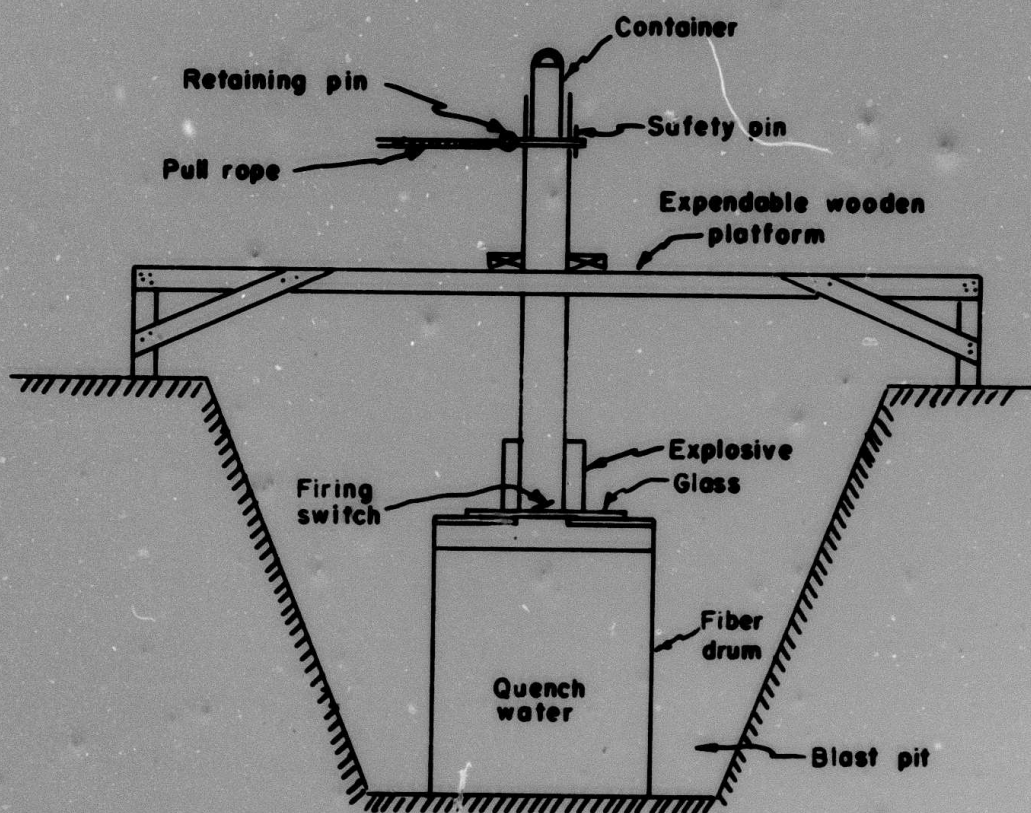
Schematic Sketch of Hot Explosive Compaction Assembly
